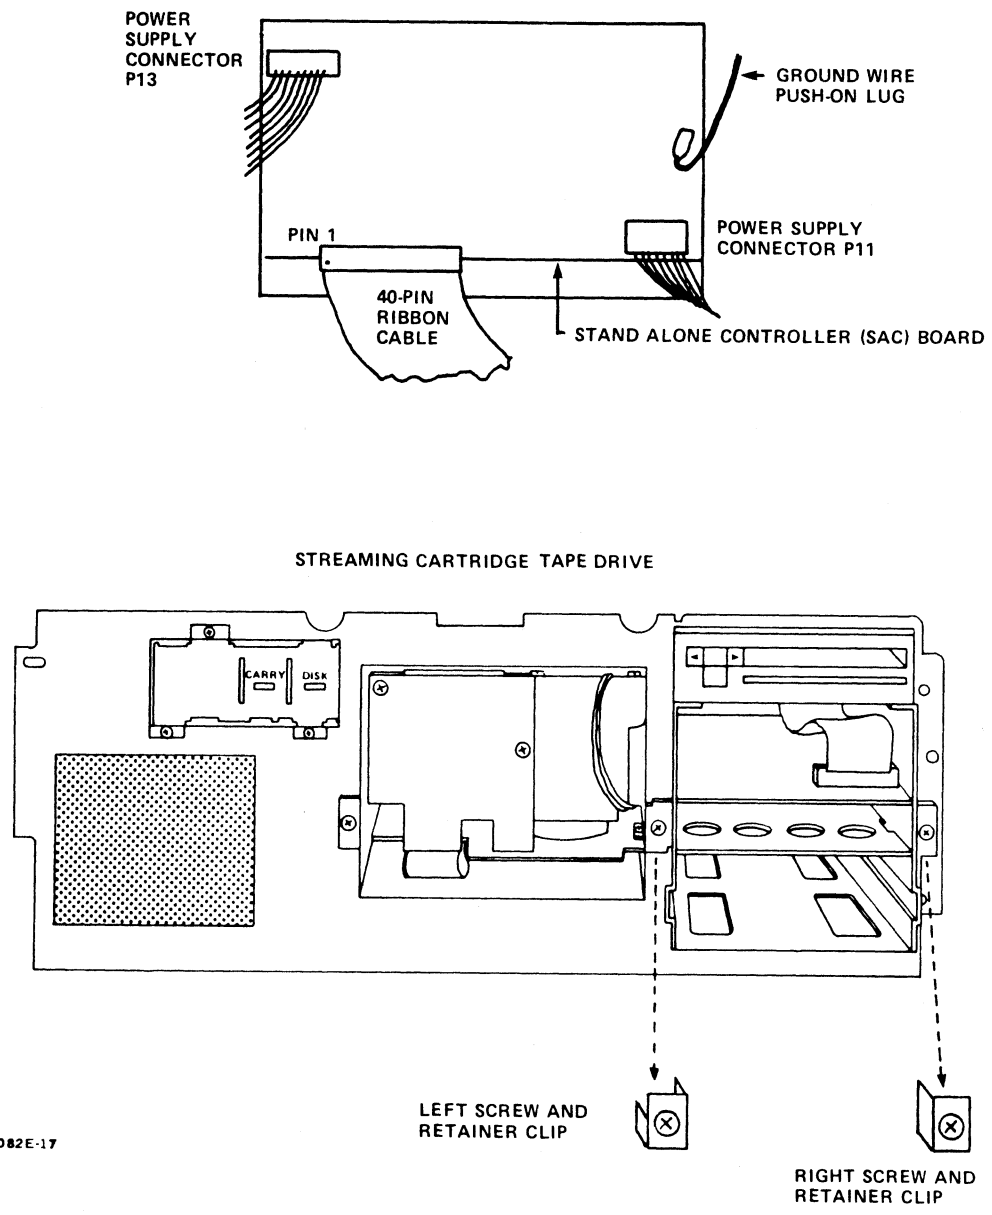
Removing the Streaming Cartridge Tape Drive
